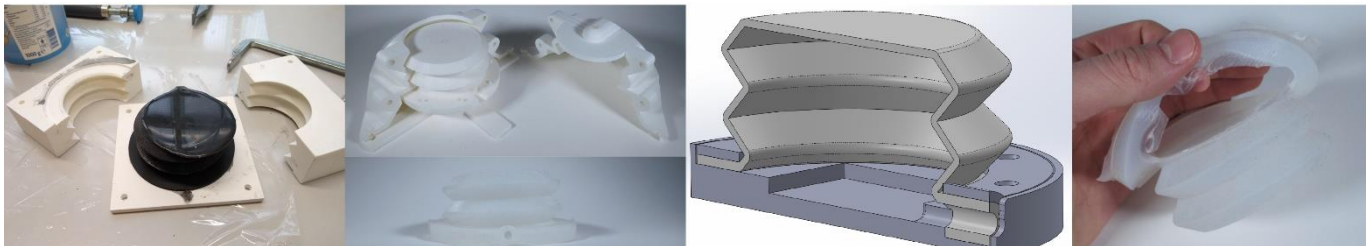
From left to right: original open bellow mold from Buso, silicon was injected from the bottom instead of pouring; final mold for improving the bellow, best bellow molded during this project; section view of how new bellow would fit in base plate; silicon molded bellow with holes due to air bubbles.
